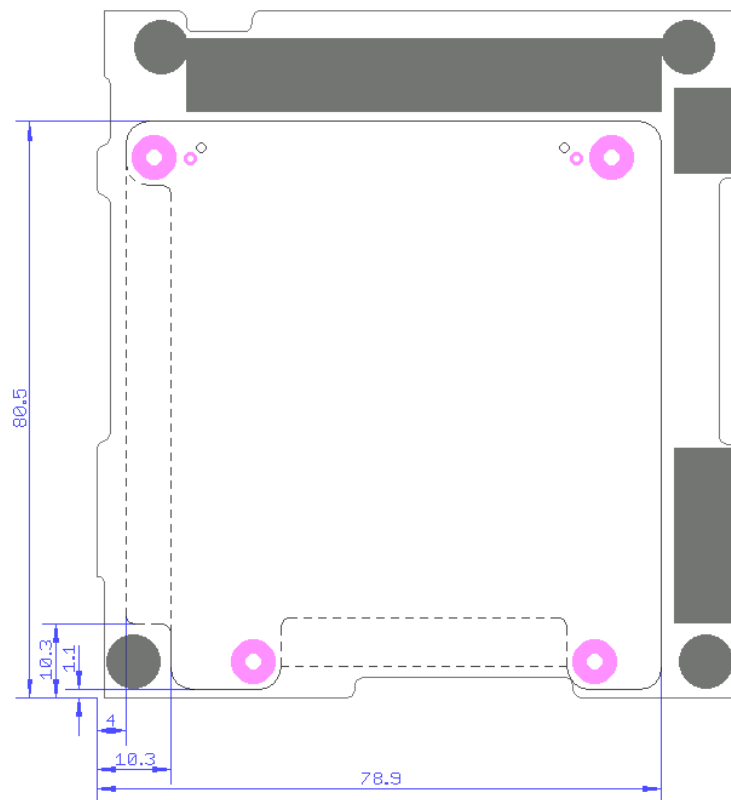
Drills, mounting points, J2 centre and H1 pin1 location (top view).
